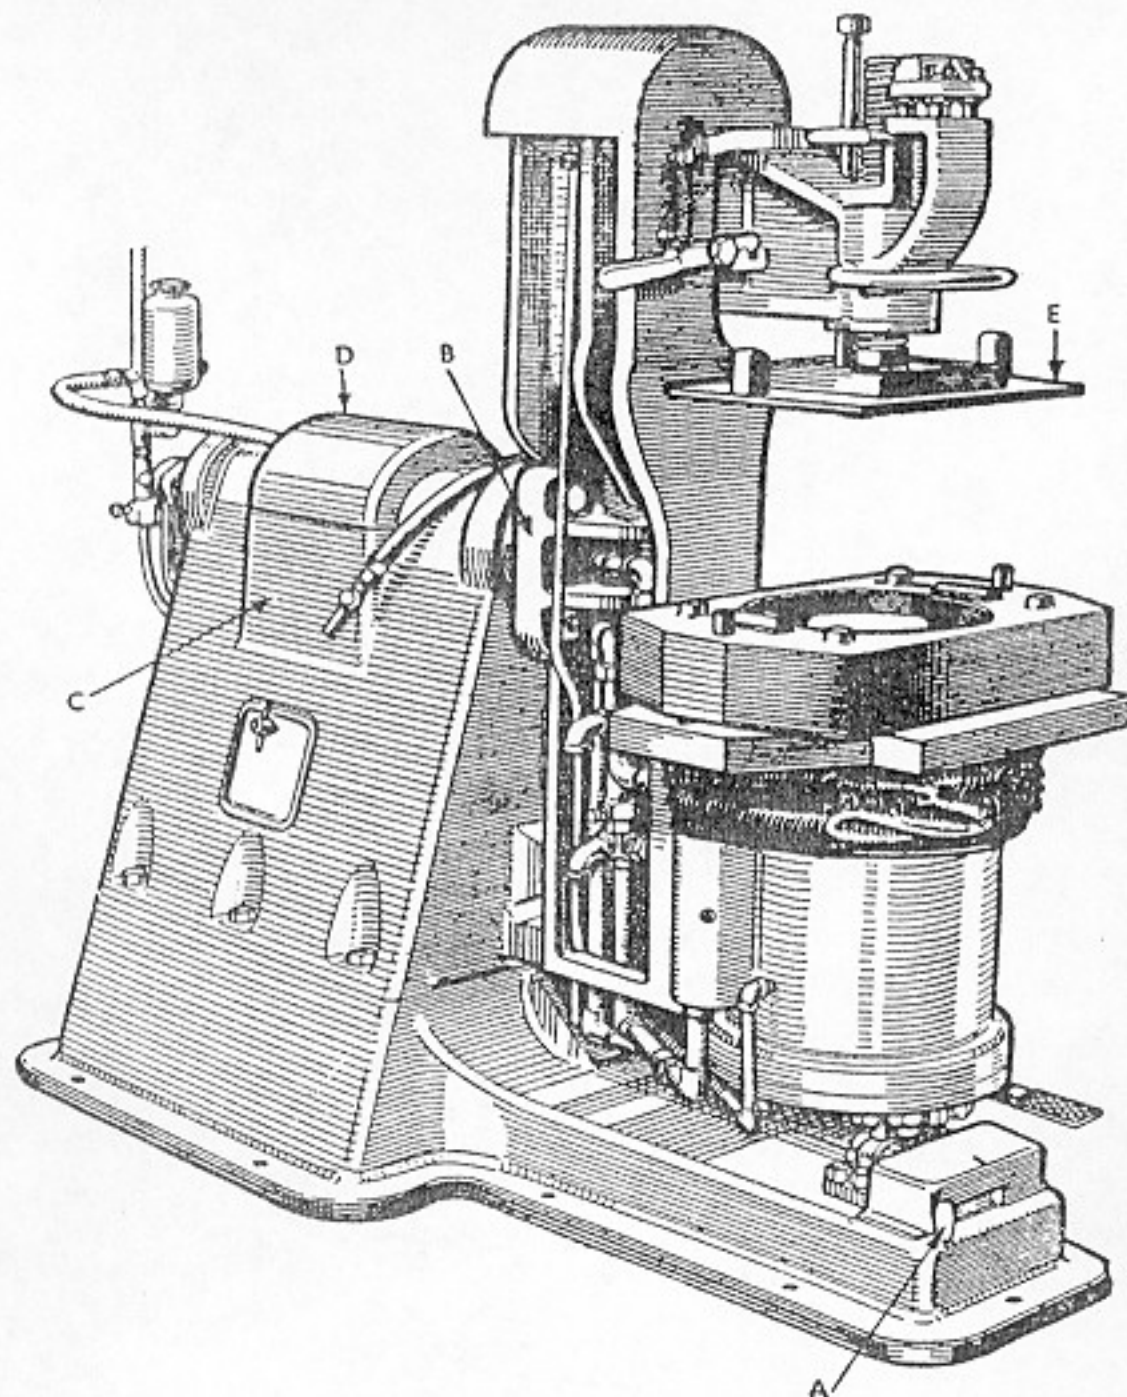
Pneumatic turn-over molding machine, showing pattern fixed on table. The method of operation is similar to the straight-draw, but the machine is turned over before the pattern is drawn. A, lever operating turn-over; B, shaft on which machine rotates; C, main housing; D, housing cover; E, squeeze-plate.
